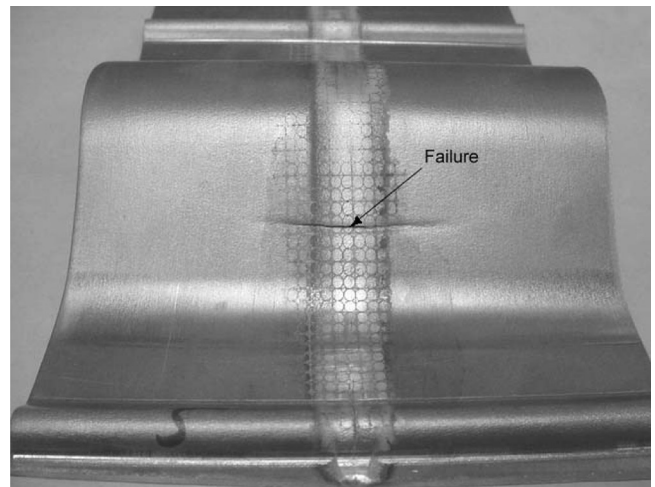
Failure in alloy 6022-T4 during the OSU test occurred in about the same location, across the weld, for all tests.
